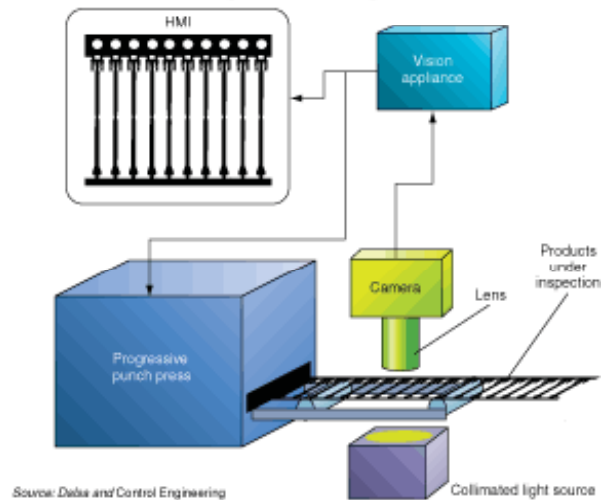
shows components in a vision system used to the dimensions of stamped metal parts made by a progressive punch press. The manufacturer was measuring sample parts off-line, so die wear or damage was not detected until thousands of bad parts were produced. The vision system, built by Faber Industrial Technologies ([www.faberinc.com](http://www.faberinc.com)), inspects each part and stops production when the part dimensions show that a die is worn or damaged.
